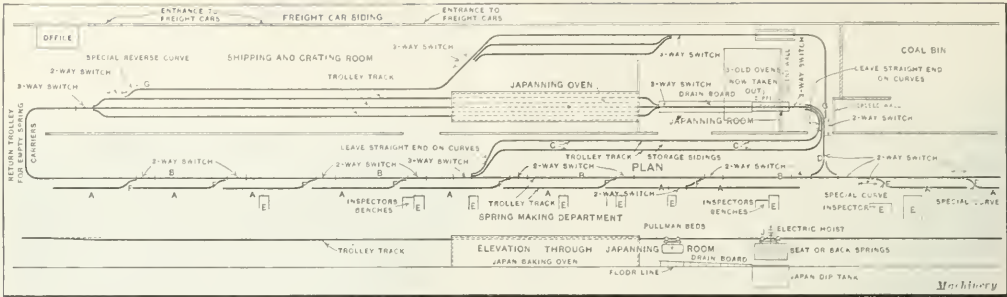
Plan and Elevation of Trolley System for handling Cushion Springs
